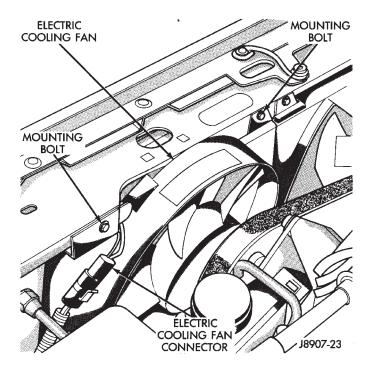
Auxiliary Electric Cooling Fan Wiring Connector—Typical
